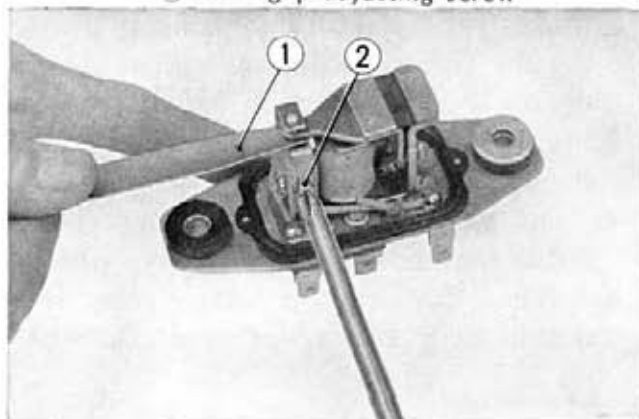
① Thickness gauge ② Point gap lock screw
